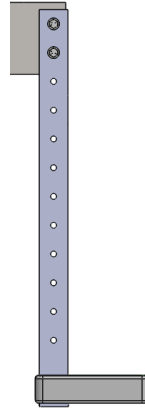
The Assembly of Crop Circle and Mounting Plate
